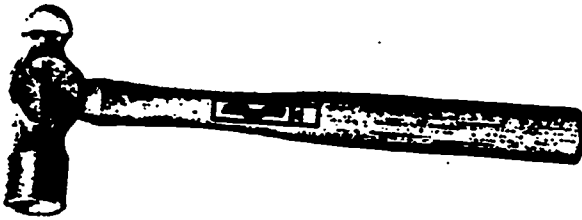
Ball peen hammers of the proper size are designed for striking chisels and punches. They also may be used for riveting, shaping, and straightening unhardened metal. (Channellock, Inc.)
